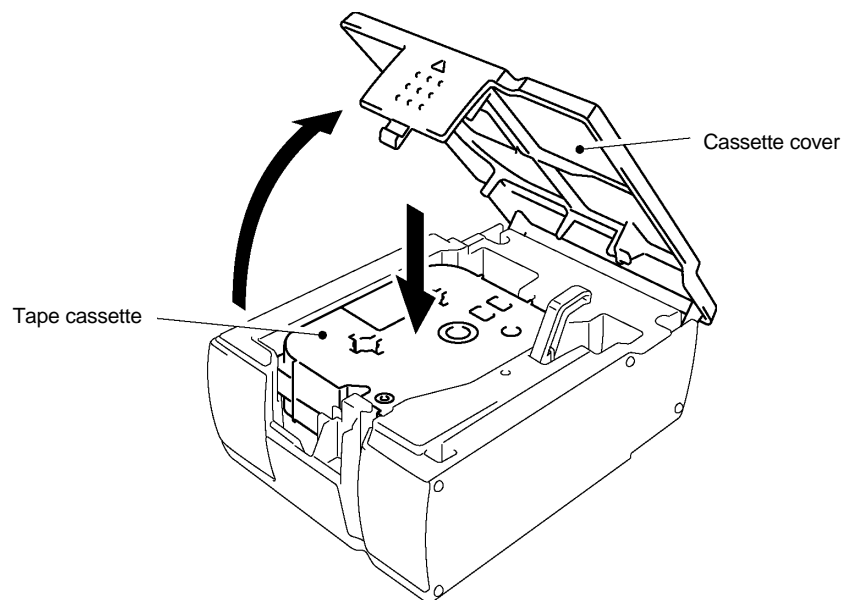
Assembling the Bottom Cover (2)
